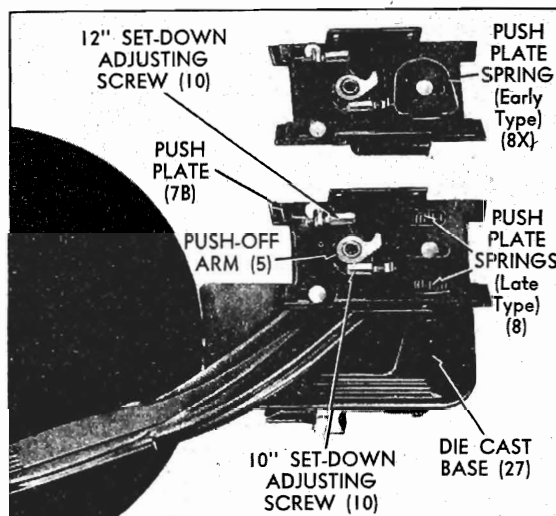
RECORD CHANGER, TOP VIEW SHOWING LOCATION OF PARTS
